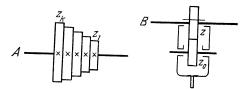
Kinematic diagram of a gear cone and tumbler gear gearbox
